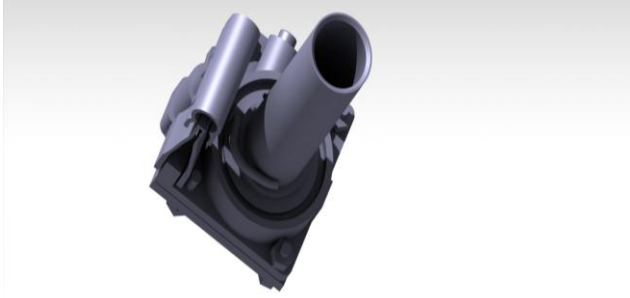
3-D drawing of the Bottle jack (Model no. QYLS5) after bending the pipe
